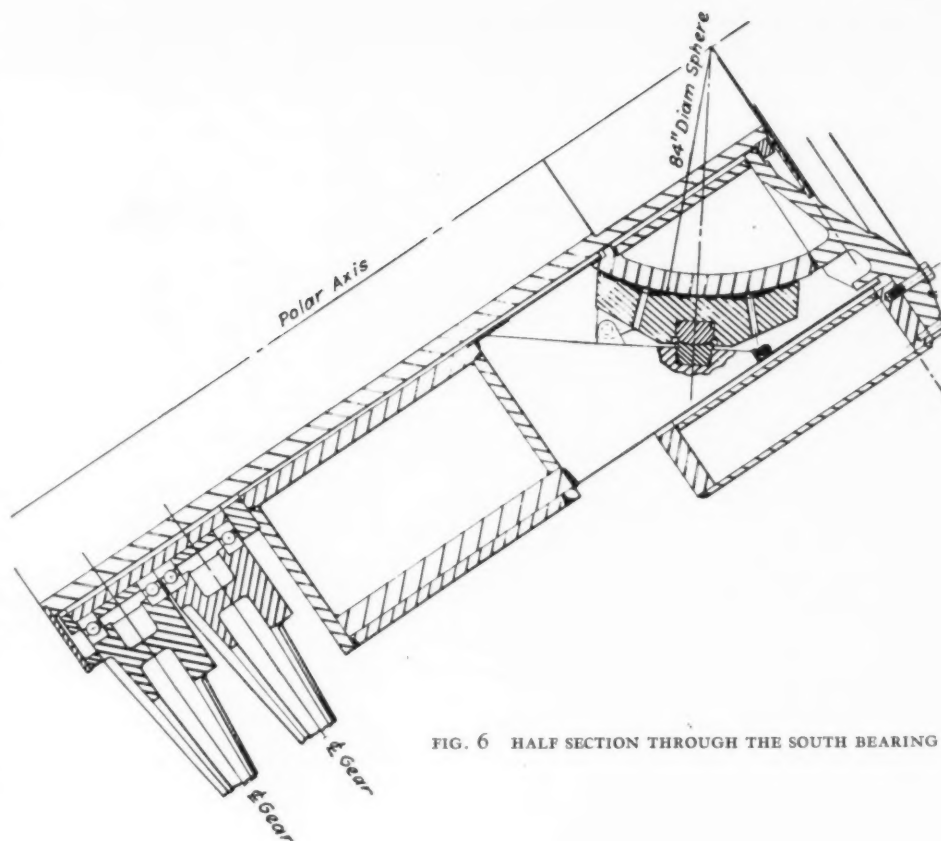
HALF SECTION THROUGH THE SOUTH BEARING
